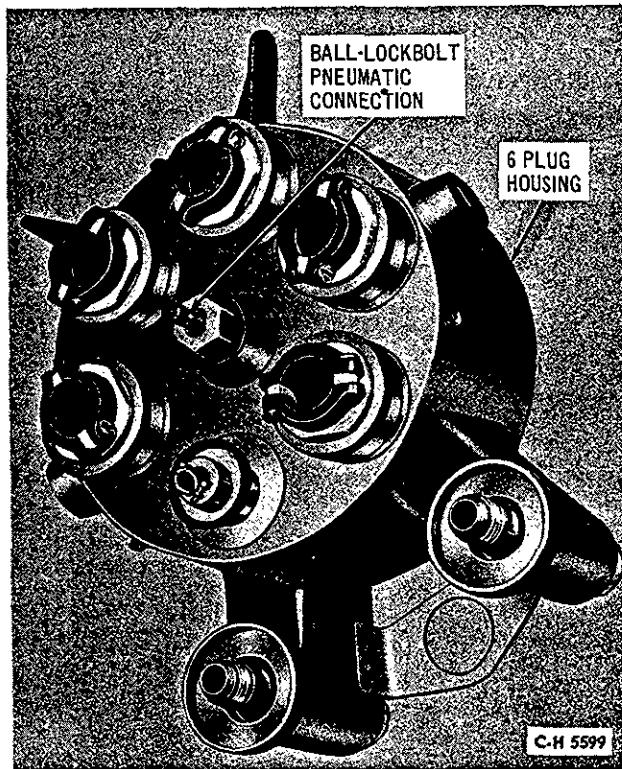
Prototype Six Plug Housing Long Cable Mast
